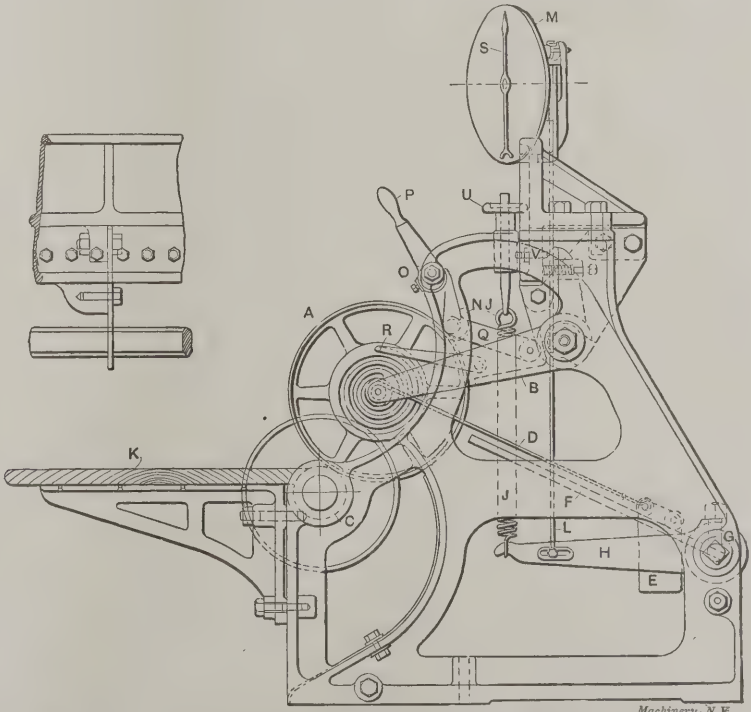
Side View, showing Measuring Wheels and Weighing Mechanism.
